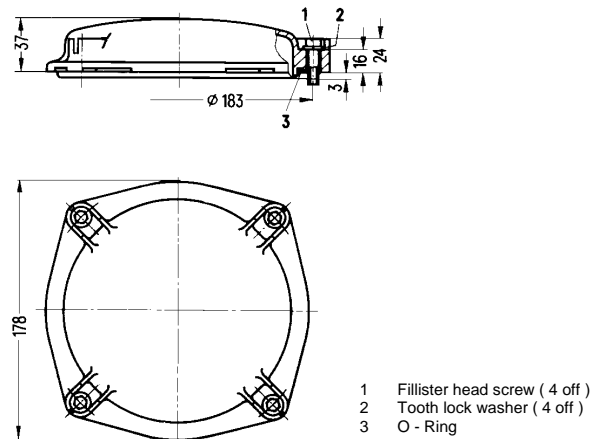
Protective cover to protect the plug assemblies on the actuator with the top of the plug removed
